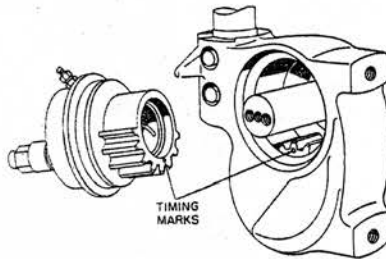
D Roll-O-Matic timing marks on gears should line up when gears are assembled. Models 50, 60
